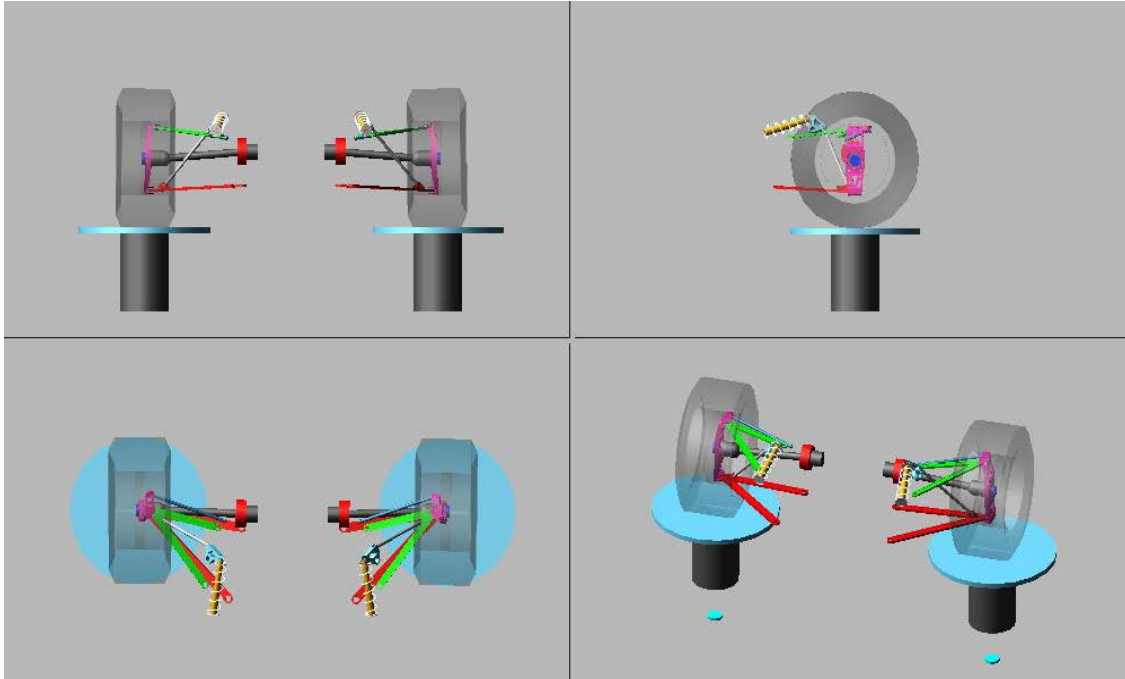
TU FSAE Rear Suspension Assembly (MBD Model Views)
